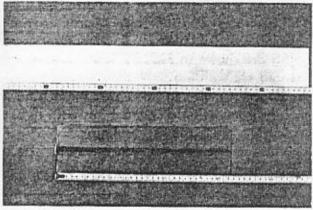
The deepest welds penetrated by the highest power EB welding machine top: aluminum alloy, dp=590mm bottom: steel, dp=320mm
